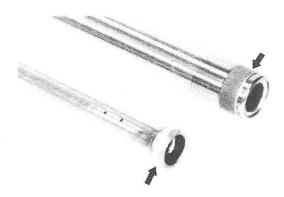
Be sure to check the fork tube and slider bushings (right arrow) and the damper rod seal (left arrow) for wear (Sec 5)
